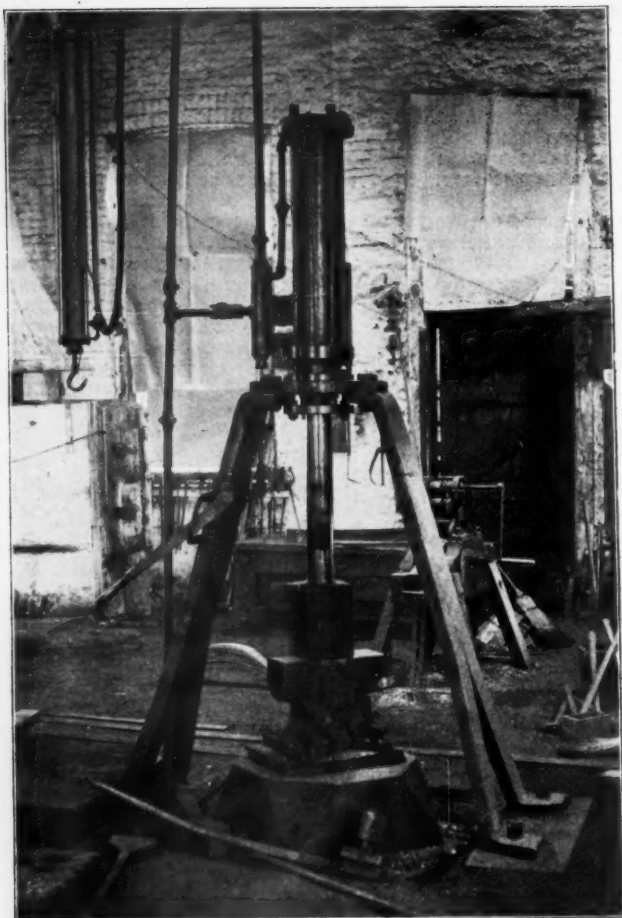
PNEUMATIC HAMMER FOR SPRING WORK.
